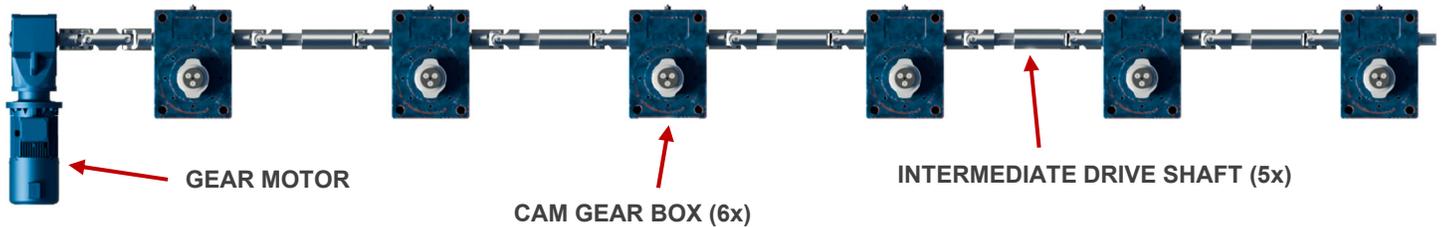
ASR-23 Cam Gear Box Positions
